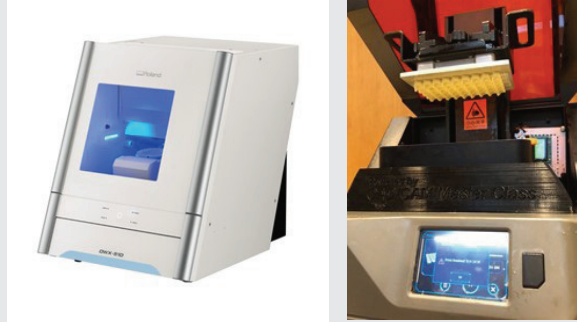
5-axis milling machine (DWX-51D, Roland) and 3D printer are capable of processing various materials.
